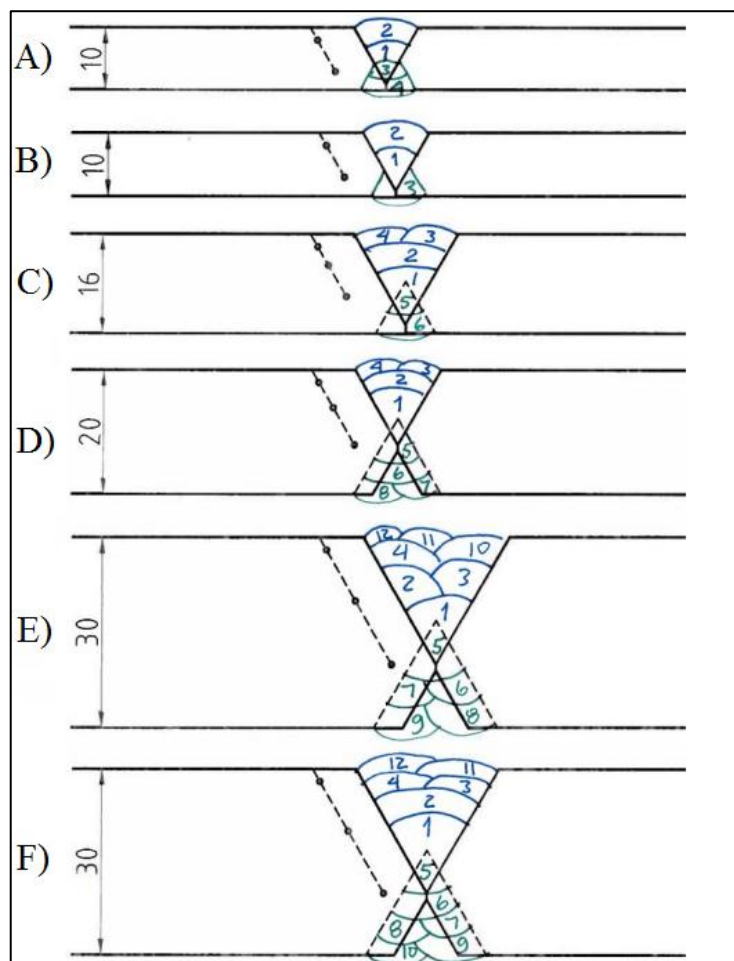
Numbering of layers and placement of thermocouples during welding. A) 10A, B) 10H, C) 16H, D) 20H, E) 30A, F) 30H
